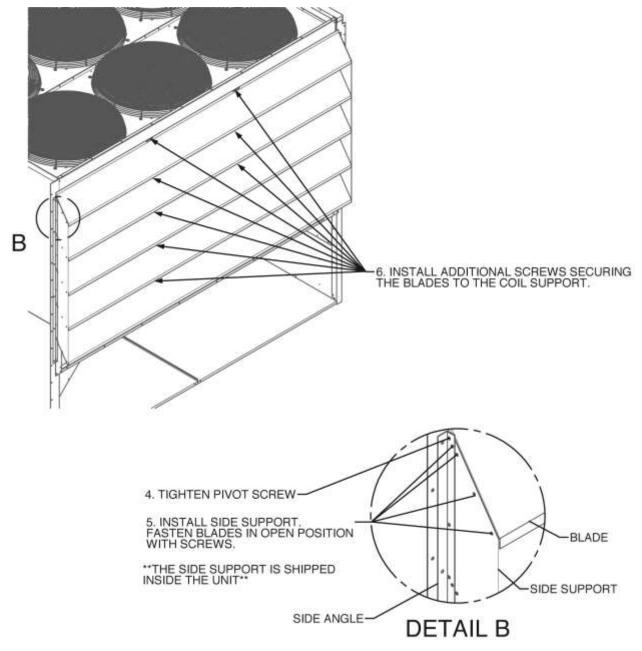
90-140 ton Condenser Coil Guard Installation Instructions 2
